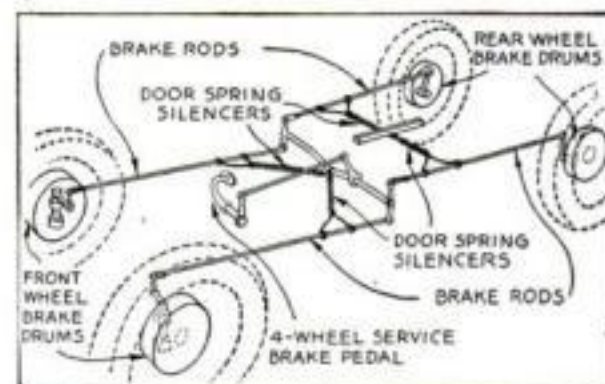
Old screen door springs can be adjusted to your car to stop brake rattling.
